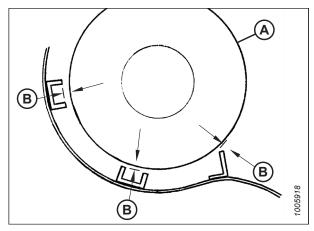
Clearance between Auger and Stripper Bars on the Auger Pan
